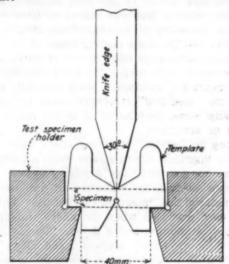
TEMPLATE FOR LOCATING IMPACT TEST-PIECE
